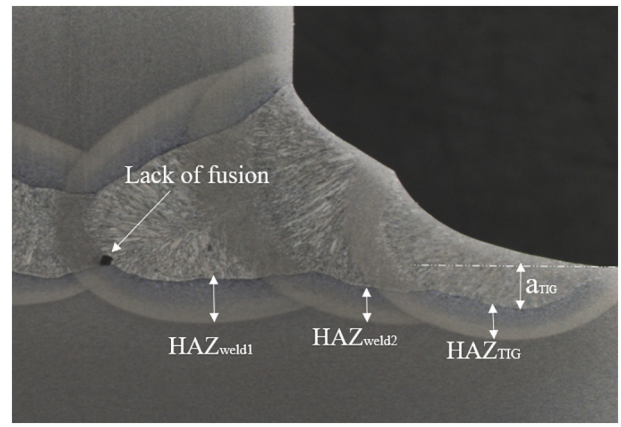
Microscopic investigation of the weldment after TIG remetting.
